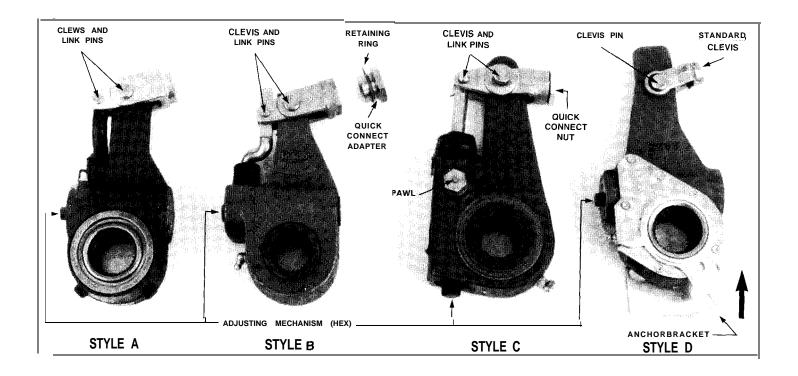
AUTOMATIC SLACK ADJUSTER TYPES
